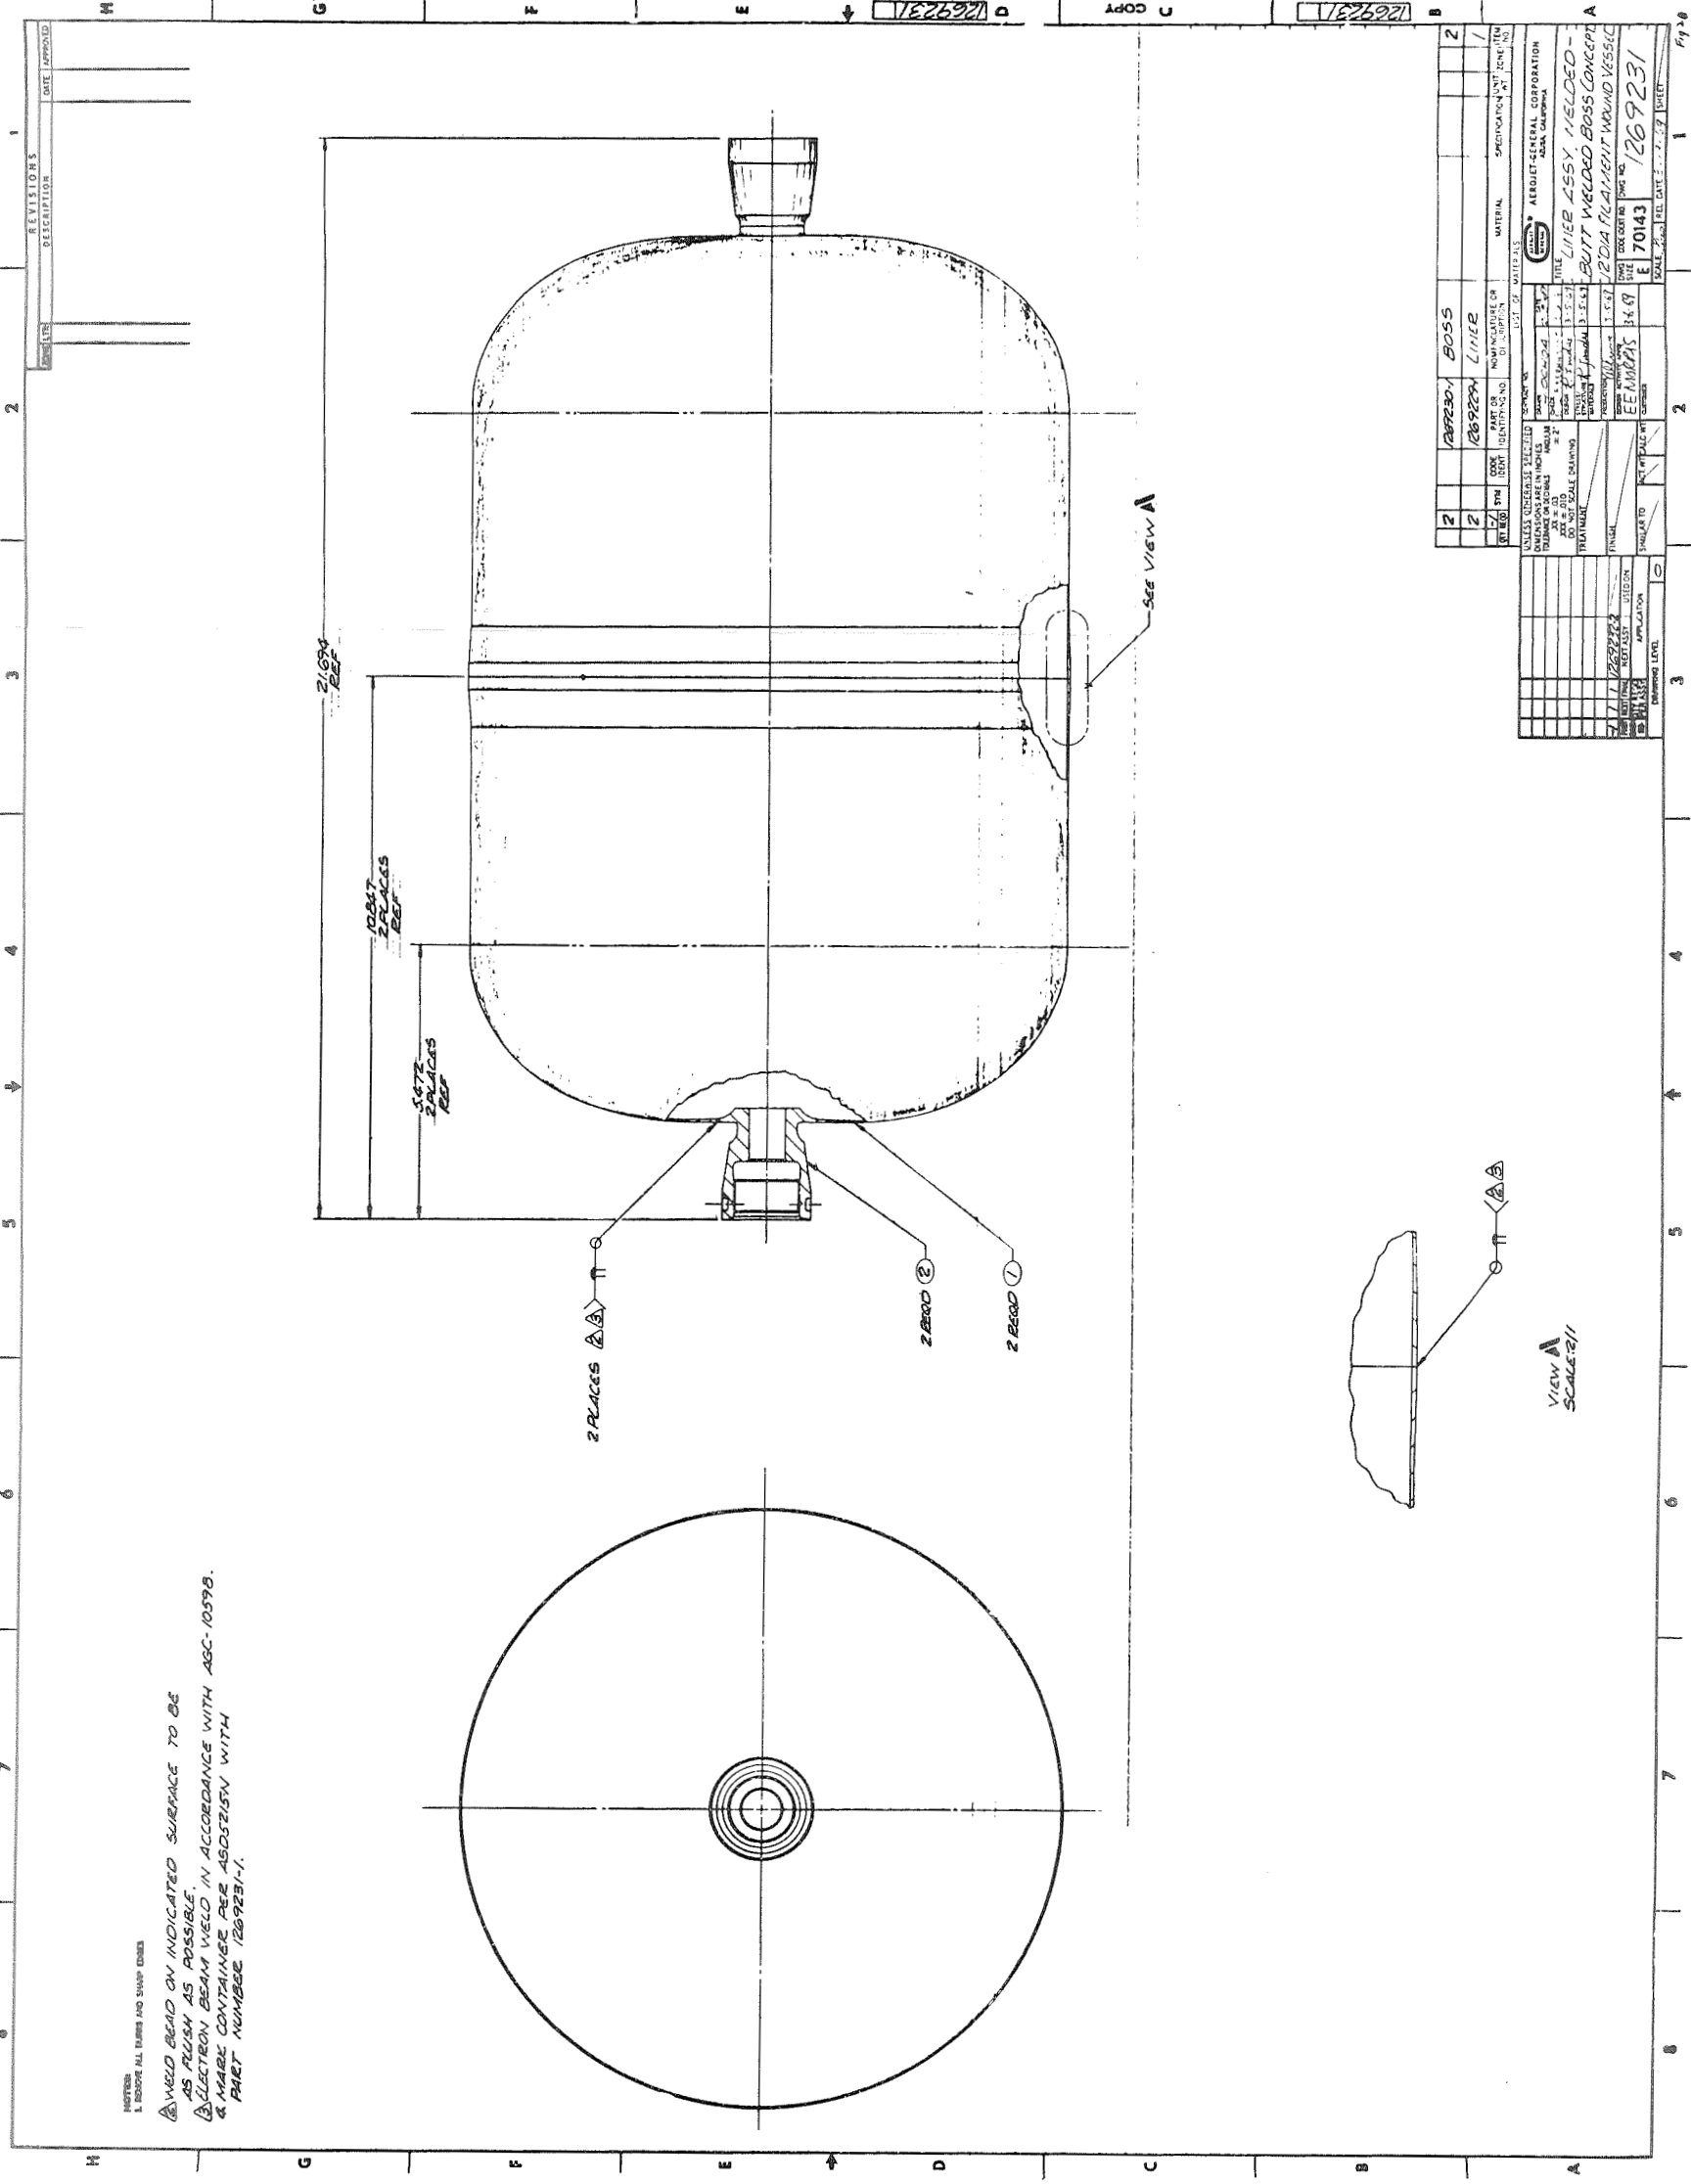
Aluminum Liner with Matched-Rotation Flange Boss
